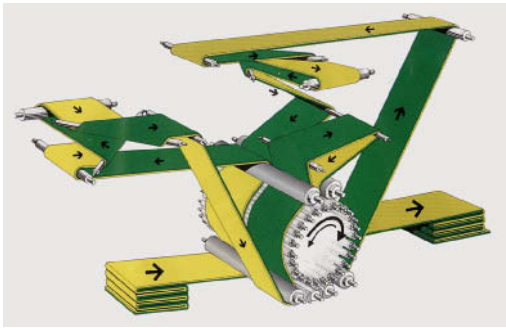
A Lamperti raising machine with turning devices for tube knitted goods.
